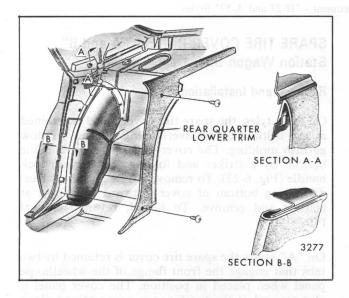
Quarter Trim Assembly Attachment - "A, B and X" Four-Door and "A-80" Styles
